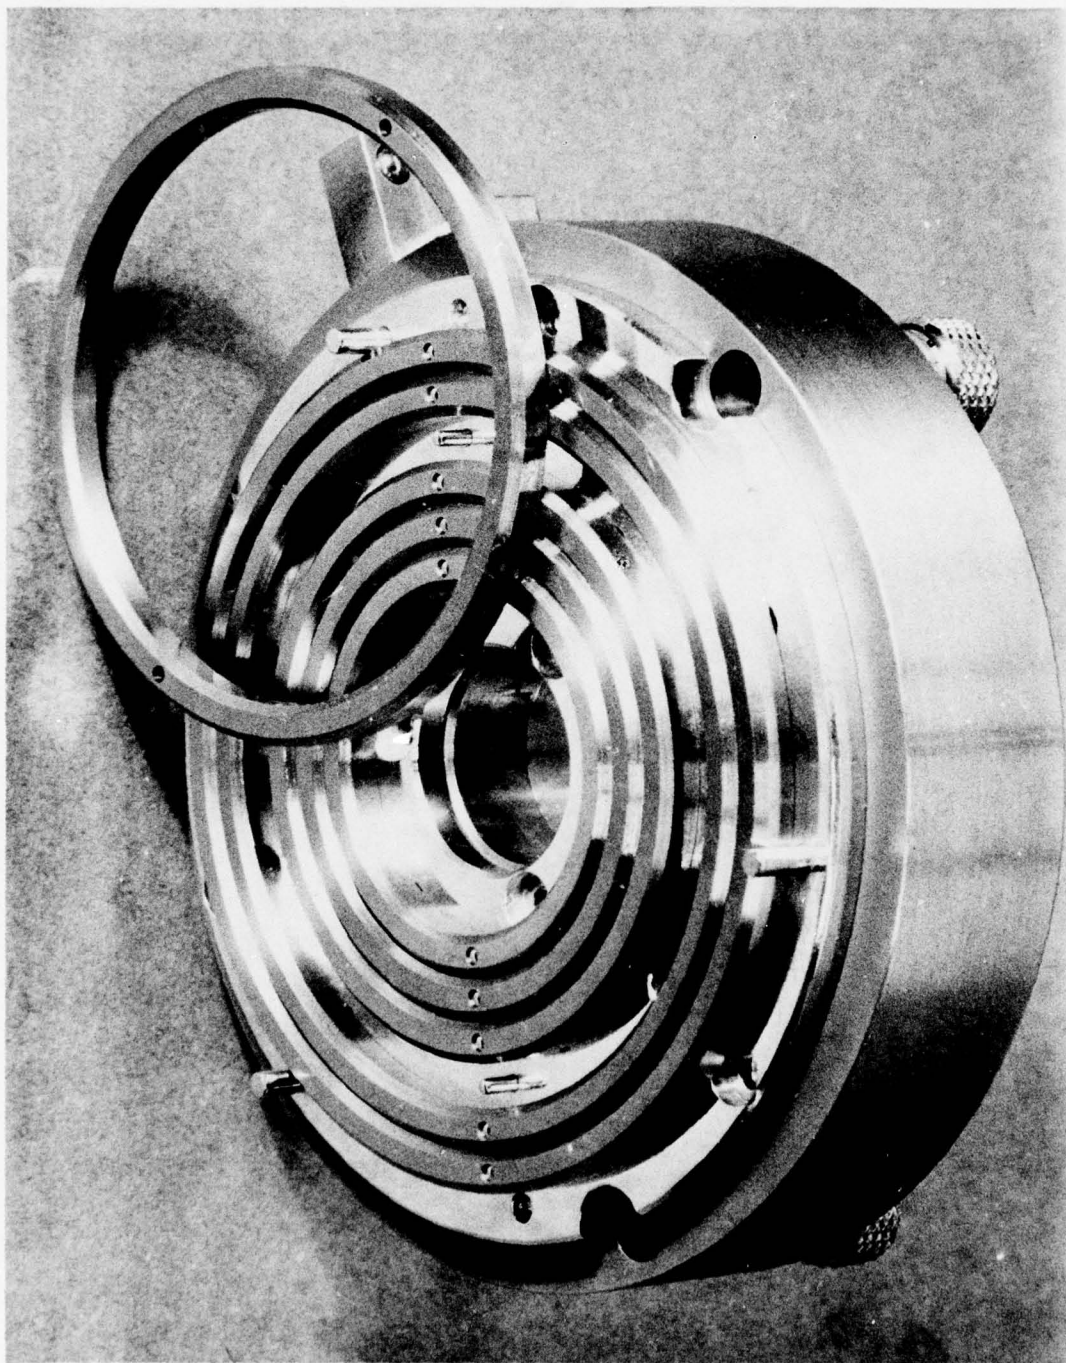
VIEW OF FIGURE 14 WITH THIRD (MIDDLE) RING REMOVED
